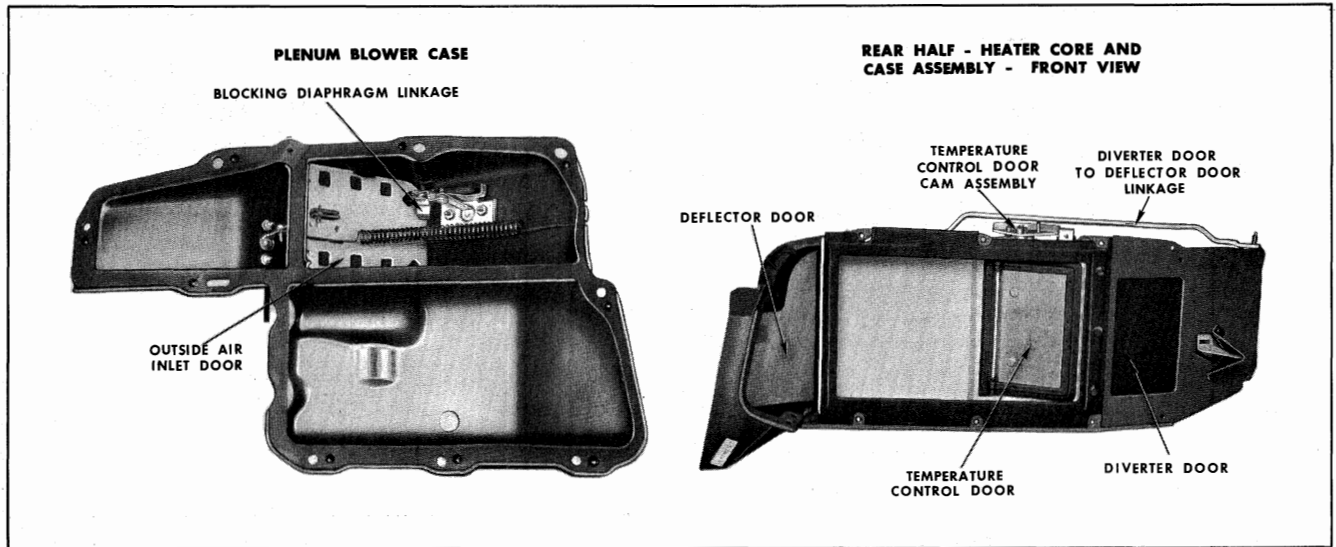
Case Assembly - Plenum Blower and Heater Core and Case Assembly
